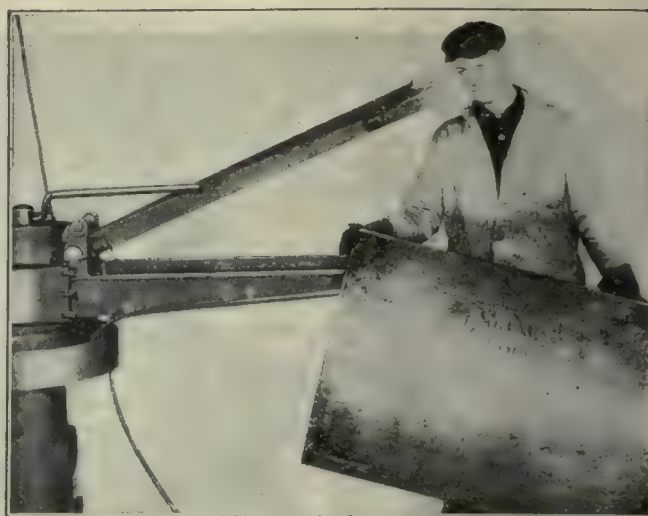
PUTTING A DRUM ONTO A TURRET ARM
